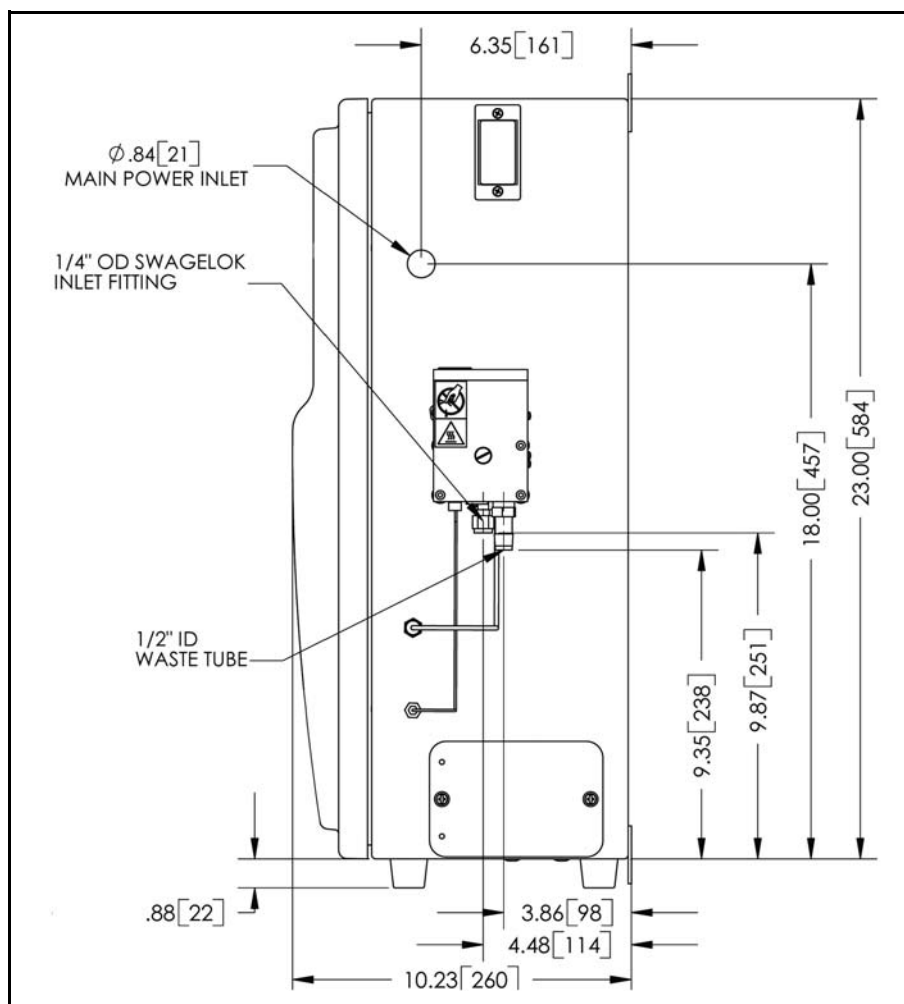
Right Side Dimensions — Sievers 900 On-Line TOC Analyzer
